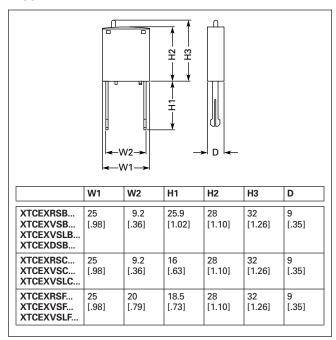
Suppressor — Approximate Dimensions in mm [in]
